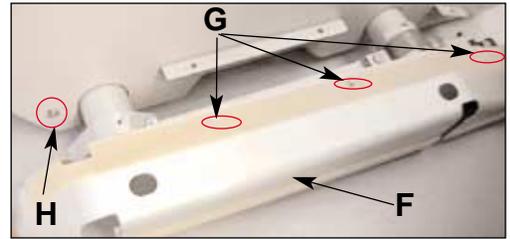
C: OUTBD ENDBAY, INNER FRONT VIEW
